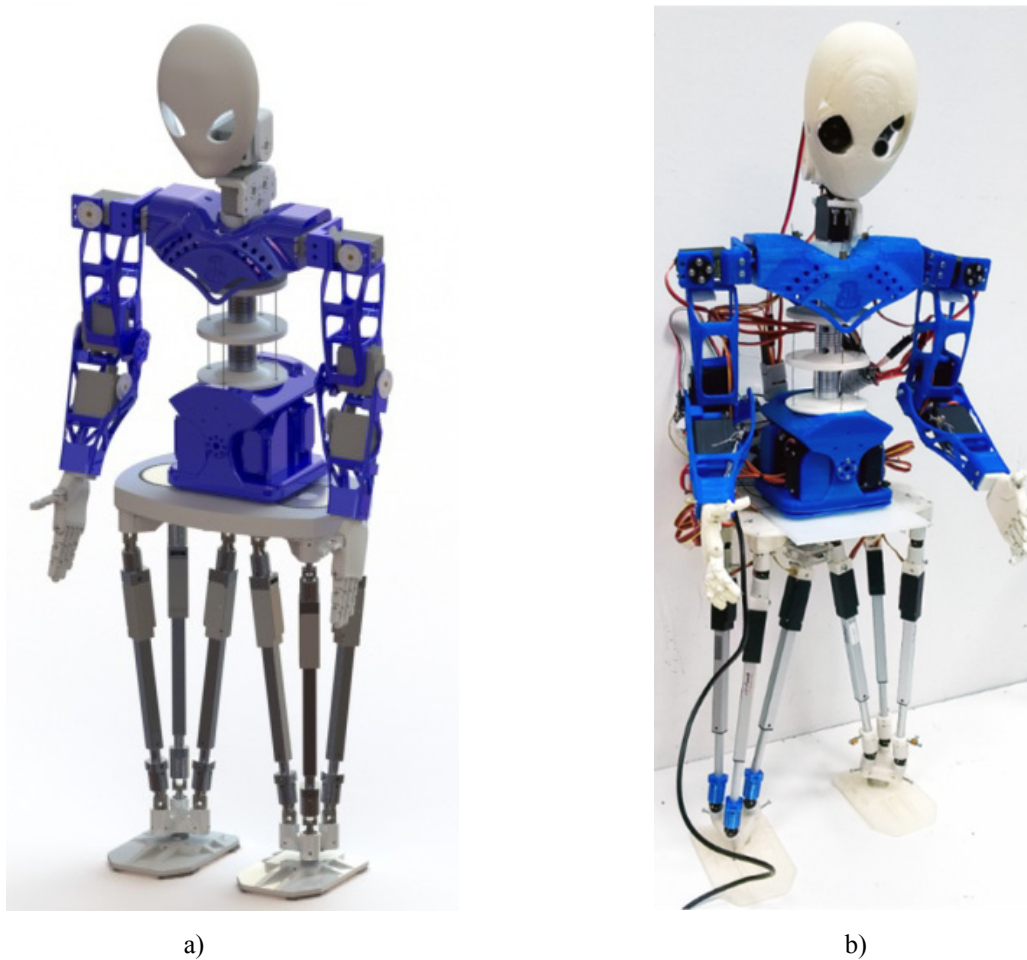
LARMbot humanoid: a) CAD Design, b) 3D printed prototype.
